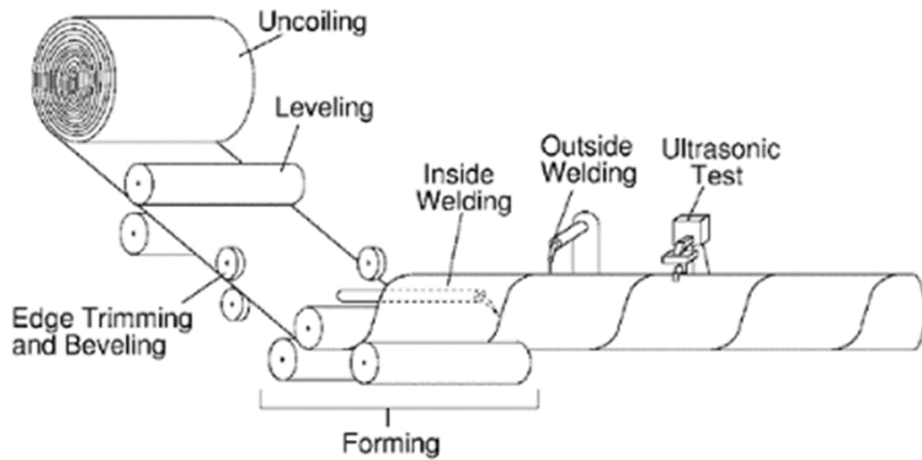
Schematic diagram of a spiral weld pipe [23].
